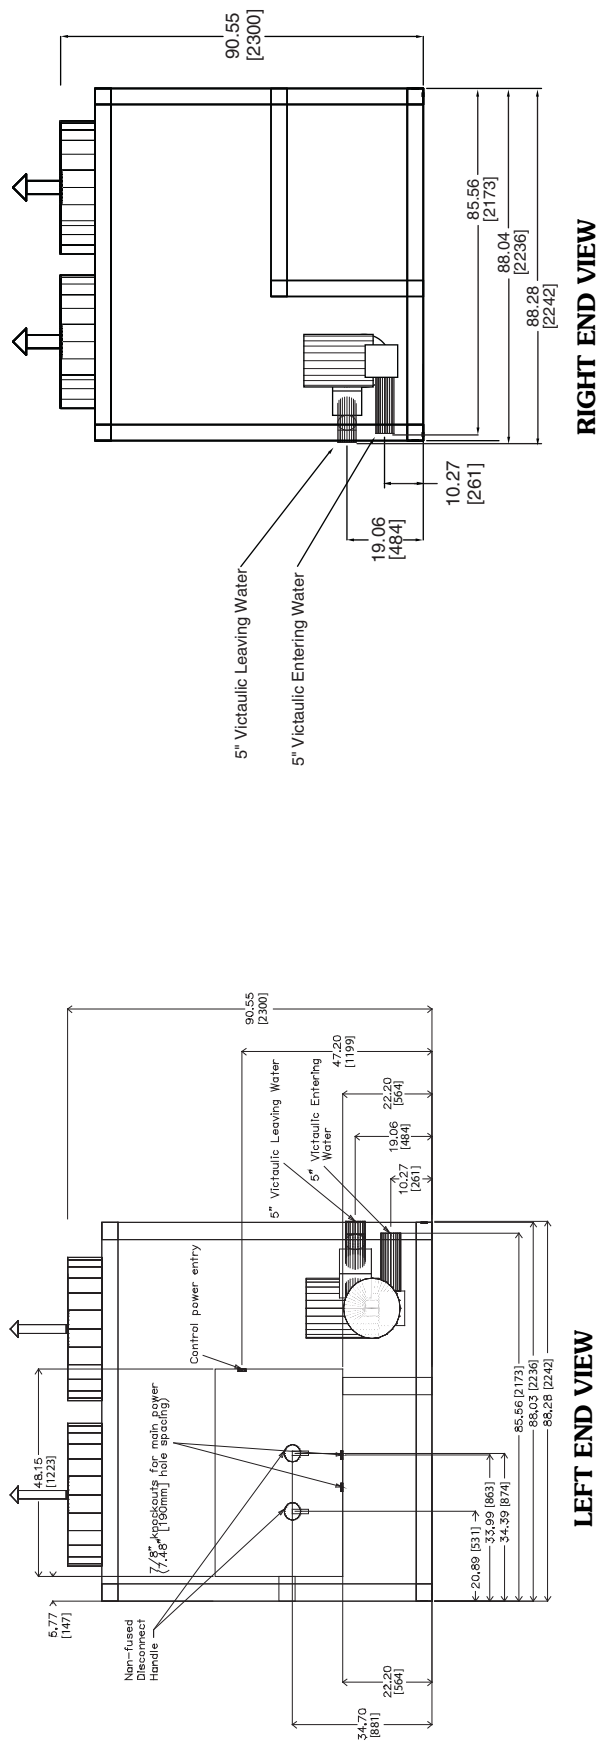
30XA090-120 Air-Cooled Liquid Chiller with Pump Dimensions (cont)
